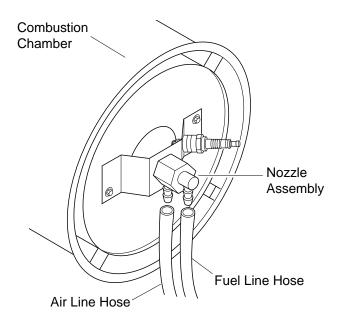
Removing Air and Fuel Line Hoses, 30,000 BTU/Hr Model
